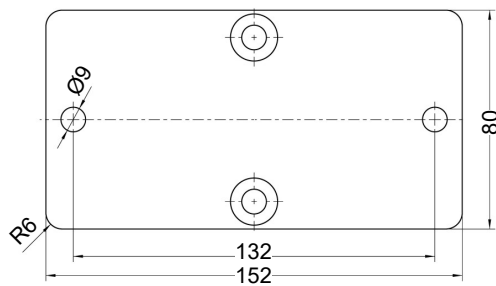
Dimensional drawing (Small measuring system Ø75)
